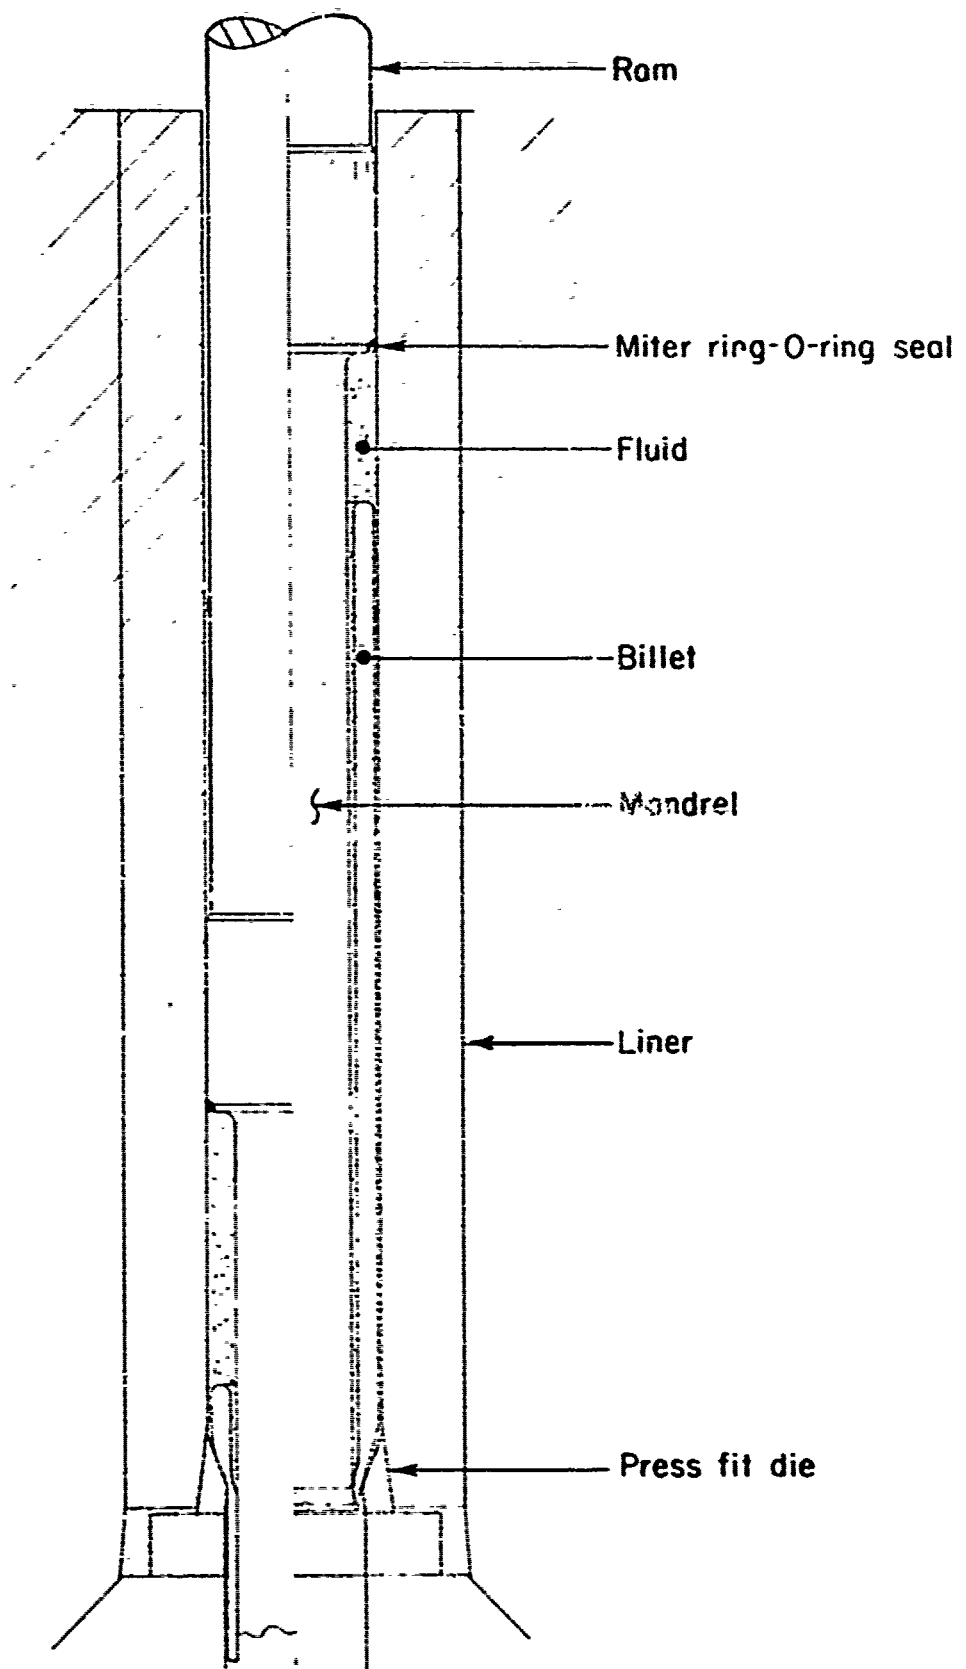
SPLIT-VIEW OF TOOLING ARRANGEMENT USED FOR EXTRUDING THE INCONEL 718 MORTAR TUBES
